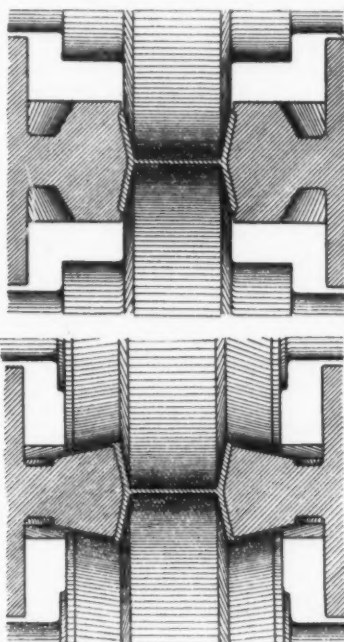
TWO MILLS ARRANGED SIDE BY SIDE
